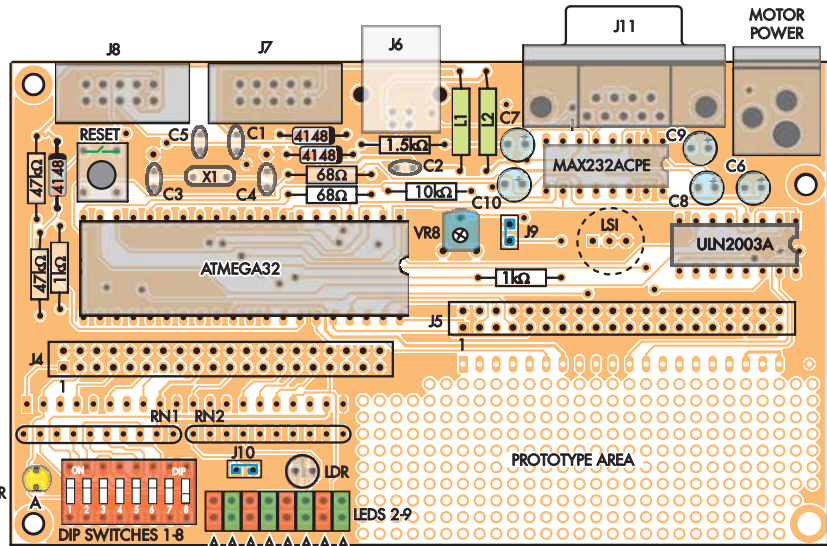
PC board layout, looking from the top (component side). The PC board is double-sided but the bottom tracks are not shown for clarity.
